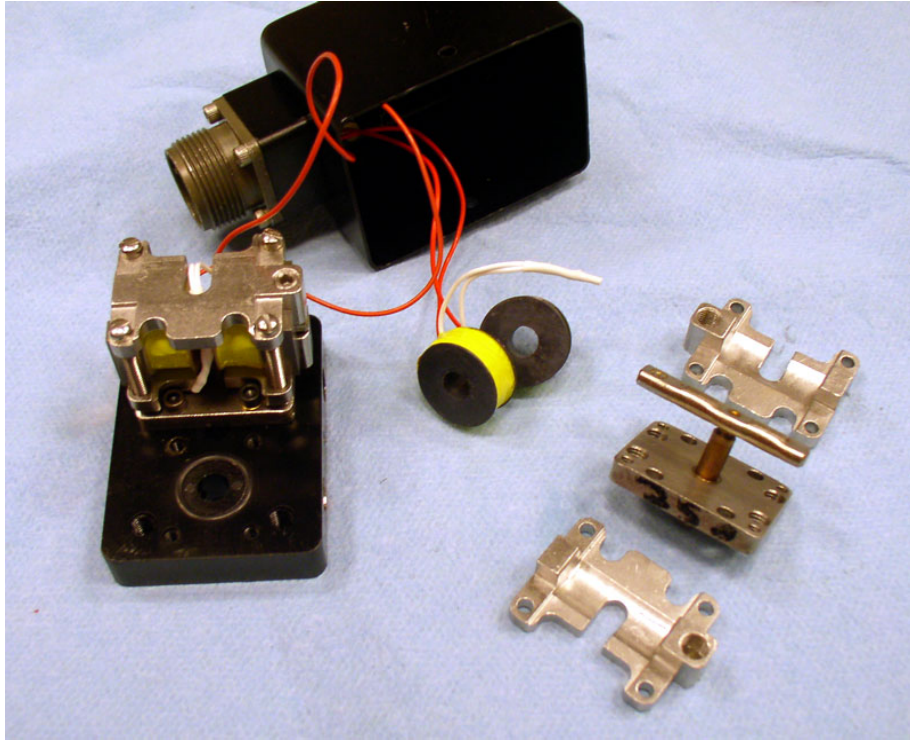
Disassembled valve from LASTI, showing T-shaped flapper assembly at right.
